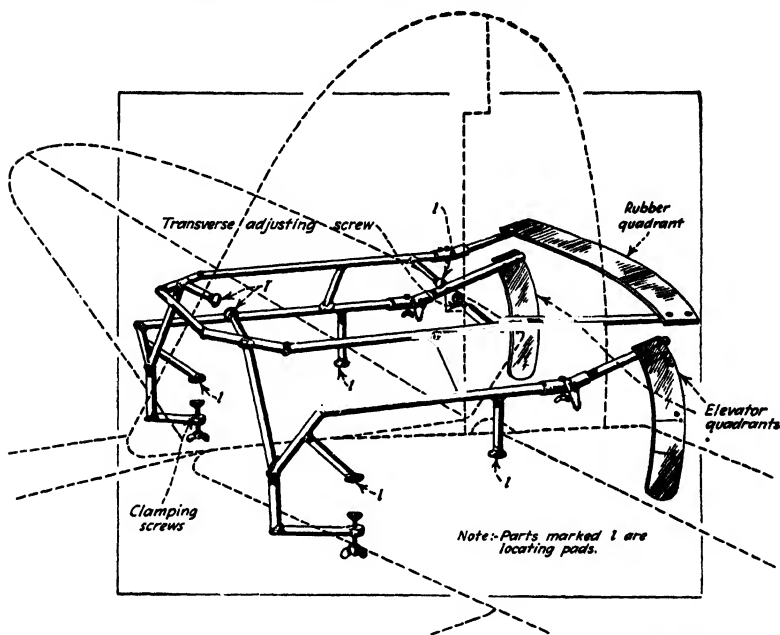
Details of the Airacobra fixture with the control surfaces shown in outline.
